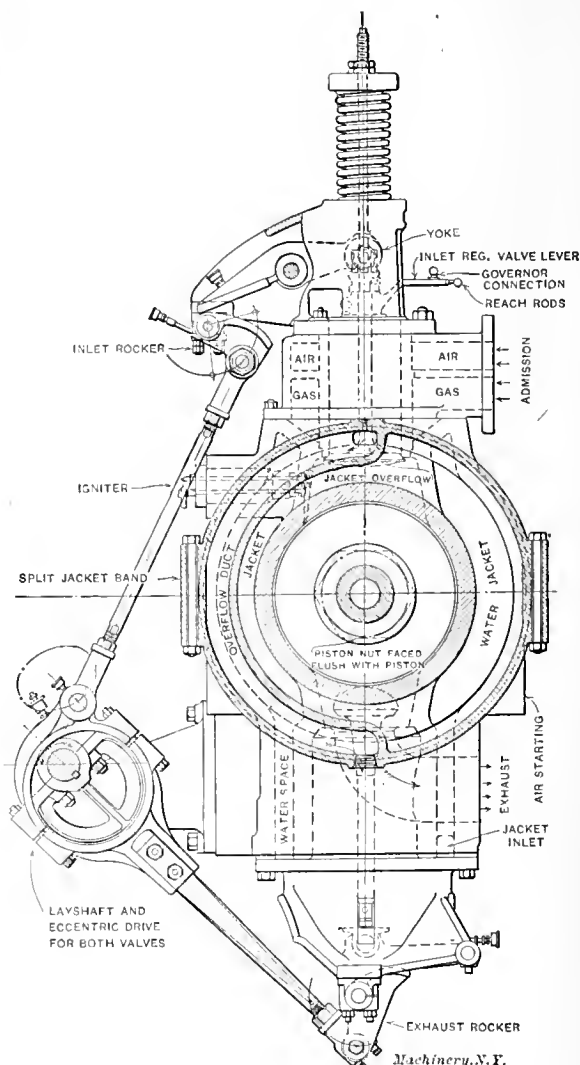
Cross-section through Cylinder showing Valves and Valve Gear.
